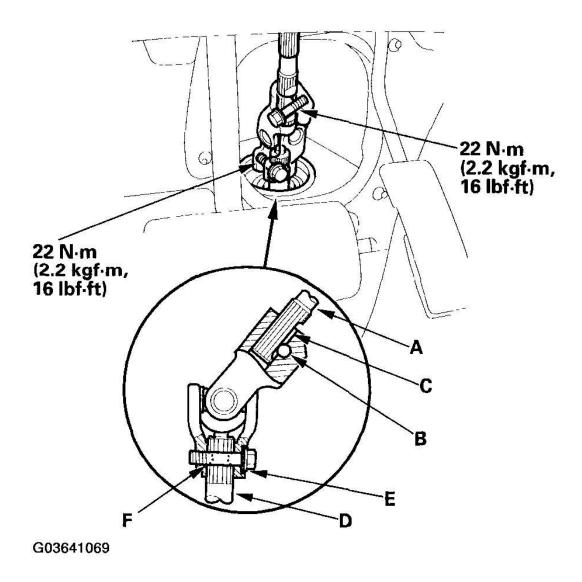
Inserting Upper End Of Steering Joint Onto Steering Shaft Courtesy of AMERICAN HONDA MOTOR CO., INC.
